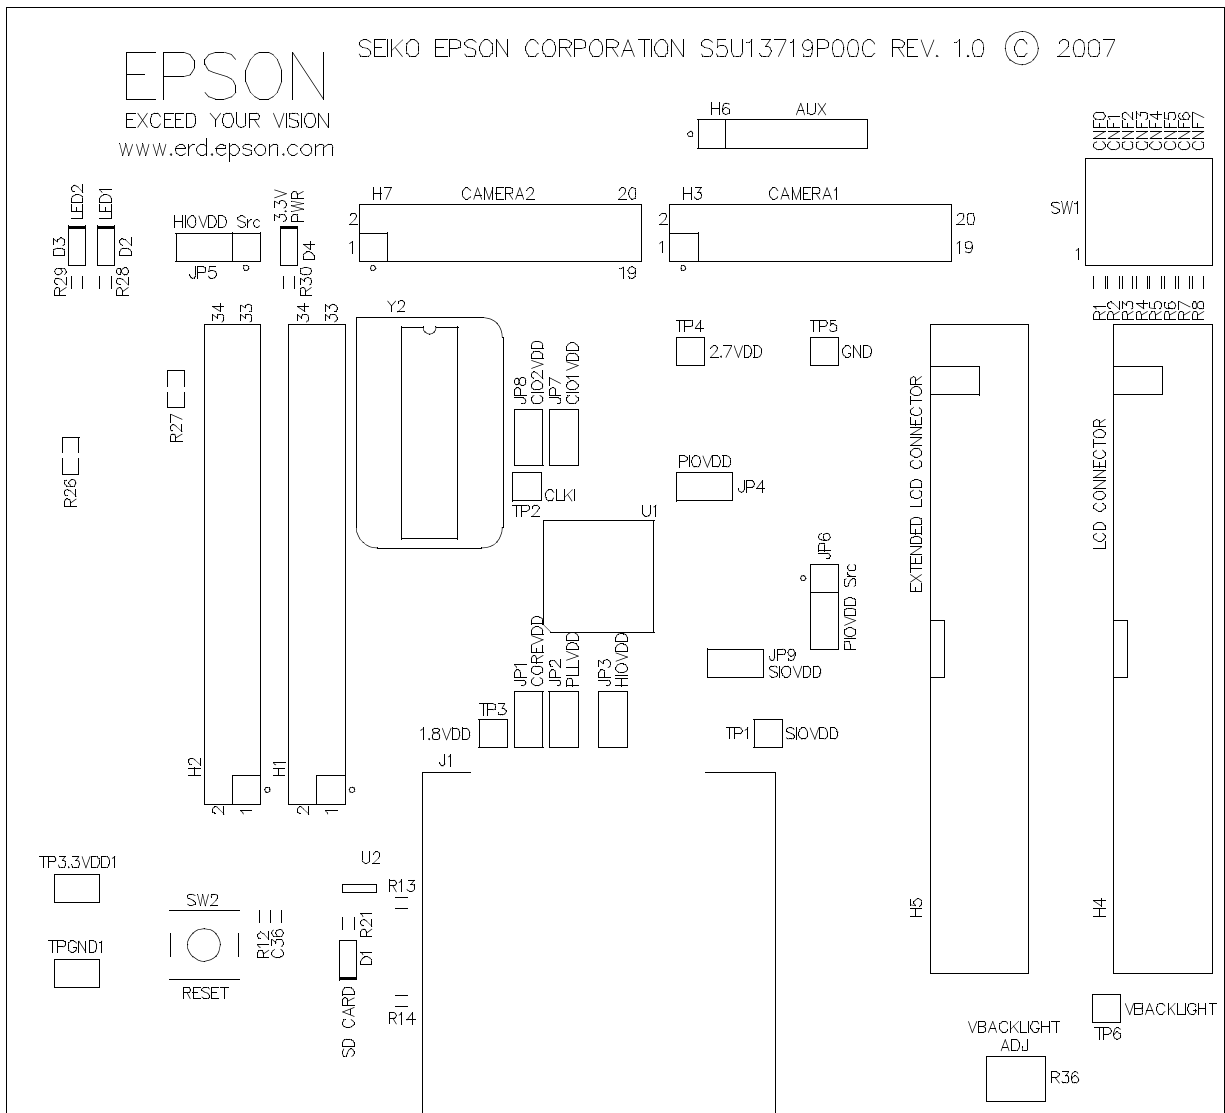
S5U13719P00C100 Board Layout - Top View
